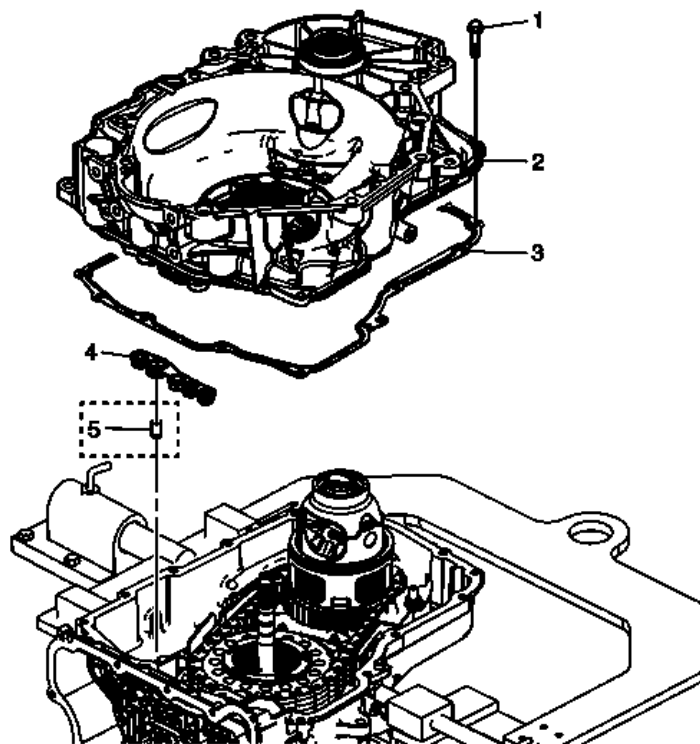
Torque Converter Housing with Fluid Pump Assembly
